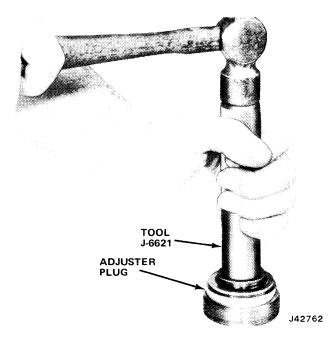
Installing Needle Bearing in Adjuster Plug
